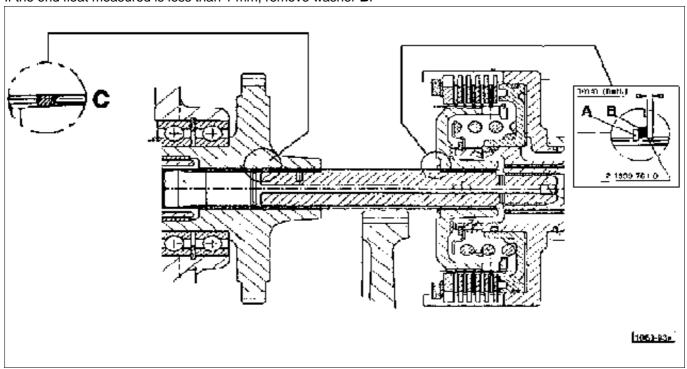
Checking end float on the front shaft of the P.T.O. clutch.
